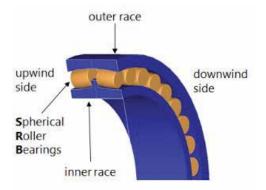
Main bearing failures predominantly occur on three-point mount turbine designs, which utilize a single double-row spherical roller bearing.
